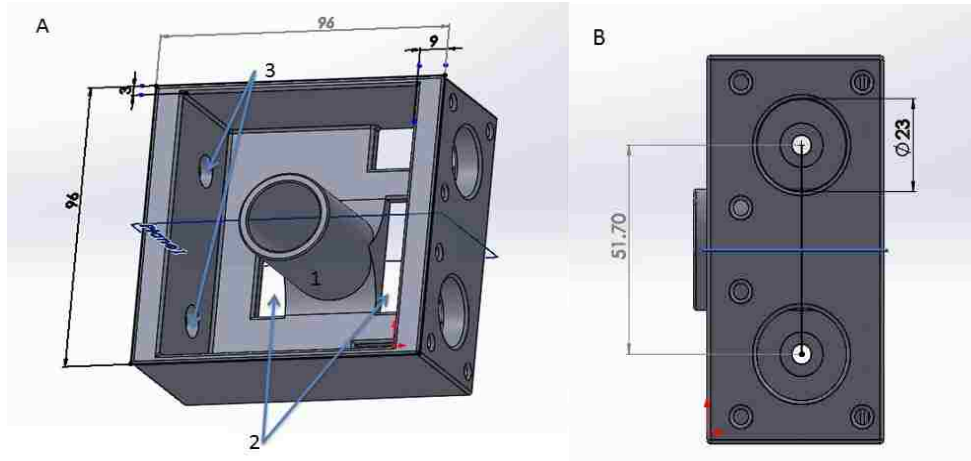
Data of the base: A-1. Indenter post; A-2. Rectangular holes facilitating the gear rack part assembly; A-3. Circular holes for the bearing; B: Center distance of two motors
